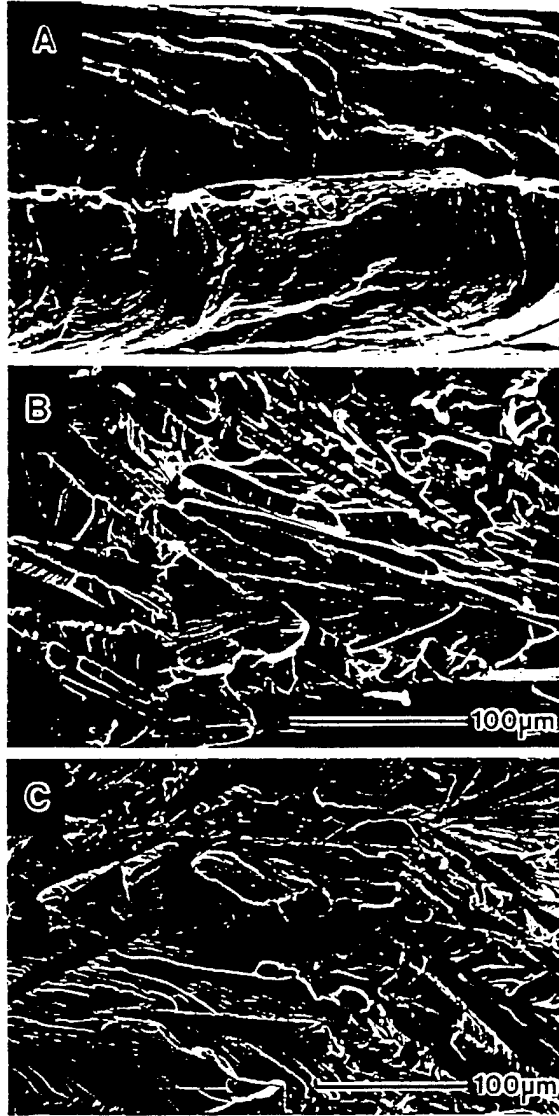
Nb unconstrained tensile fracture surfaces at 77K
